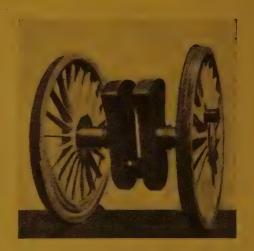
Crank axle at leading wheel showing balanced crank webs.
